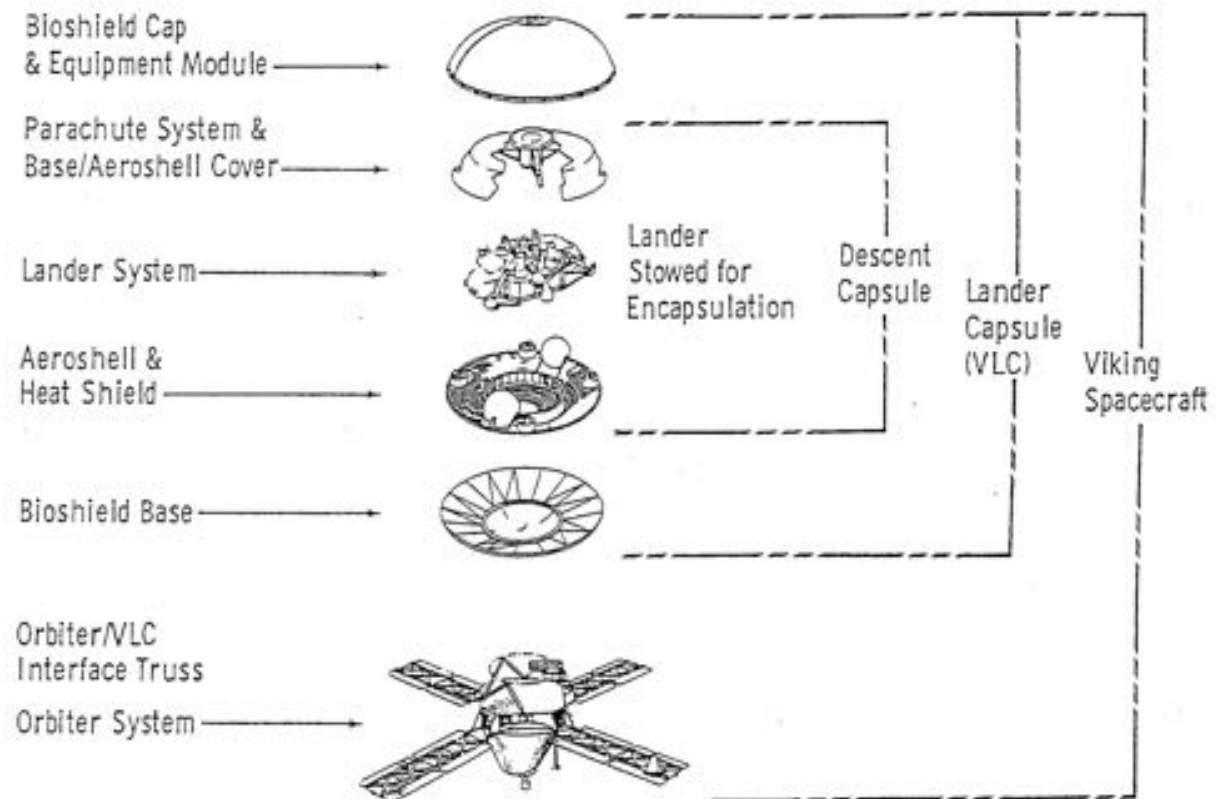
Exploded View: Major Elements of Viking Lander Capsule
